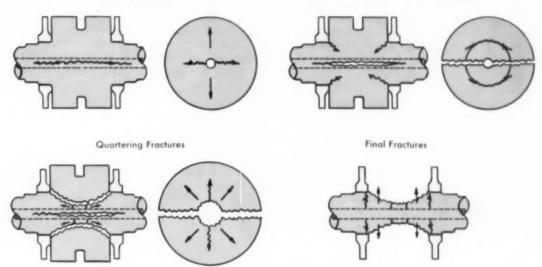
Sequence of Failure of Ridgeland Rotor Forging
